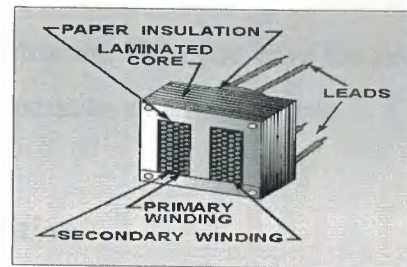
Cutaway view of shell-type core with windings.
